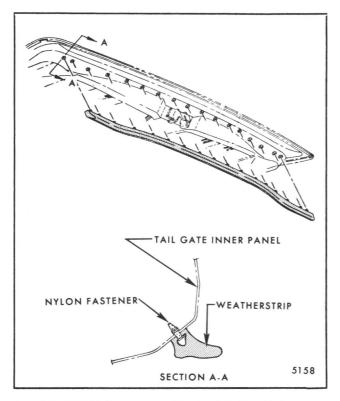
Tailgate Lower Weatherstrip Installation
